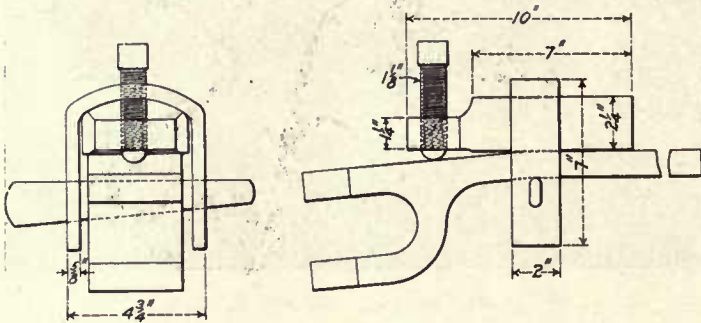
Device for Bending Eccentric Blades, Brake Levers, Etc.
